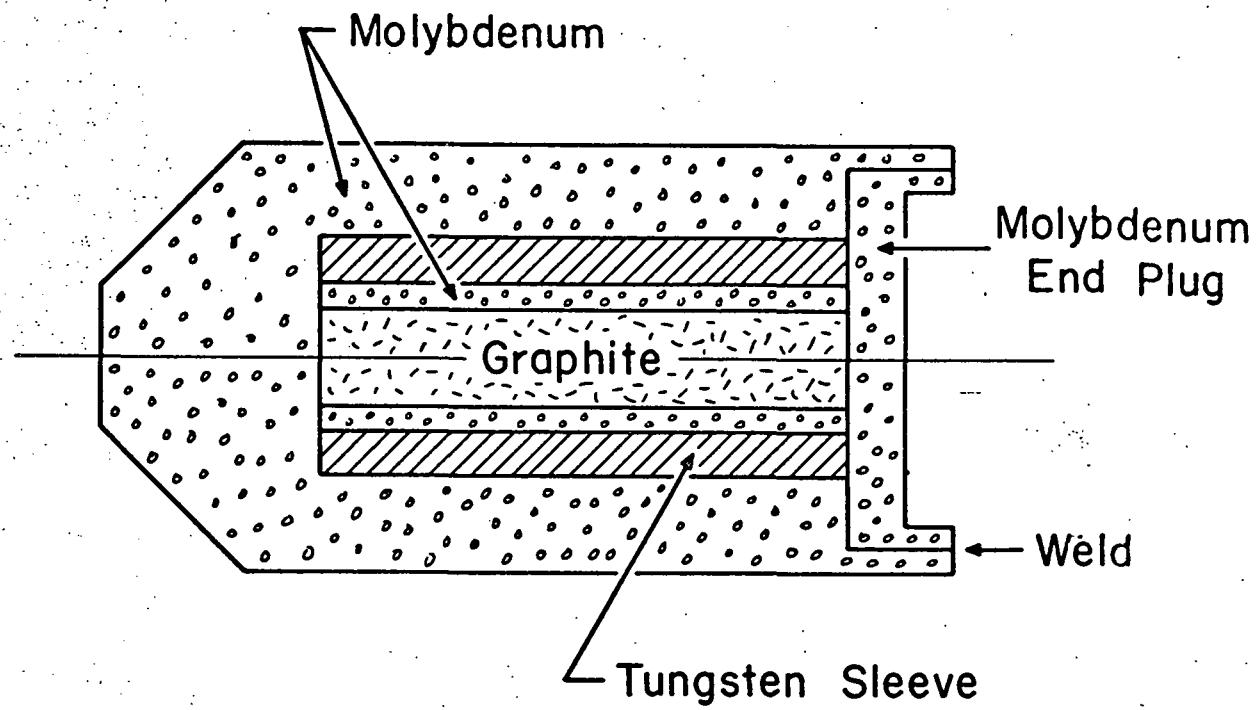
Billet for 3300°F Extrusion of Tungsten Tubes
